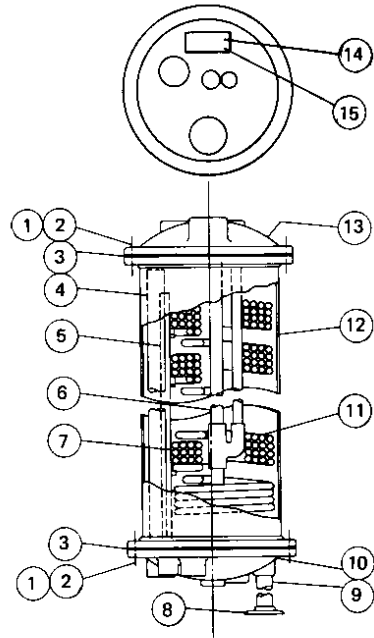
Angely Hot Water Generator, Models 1004B to 1016B Assembly and Parts List
